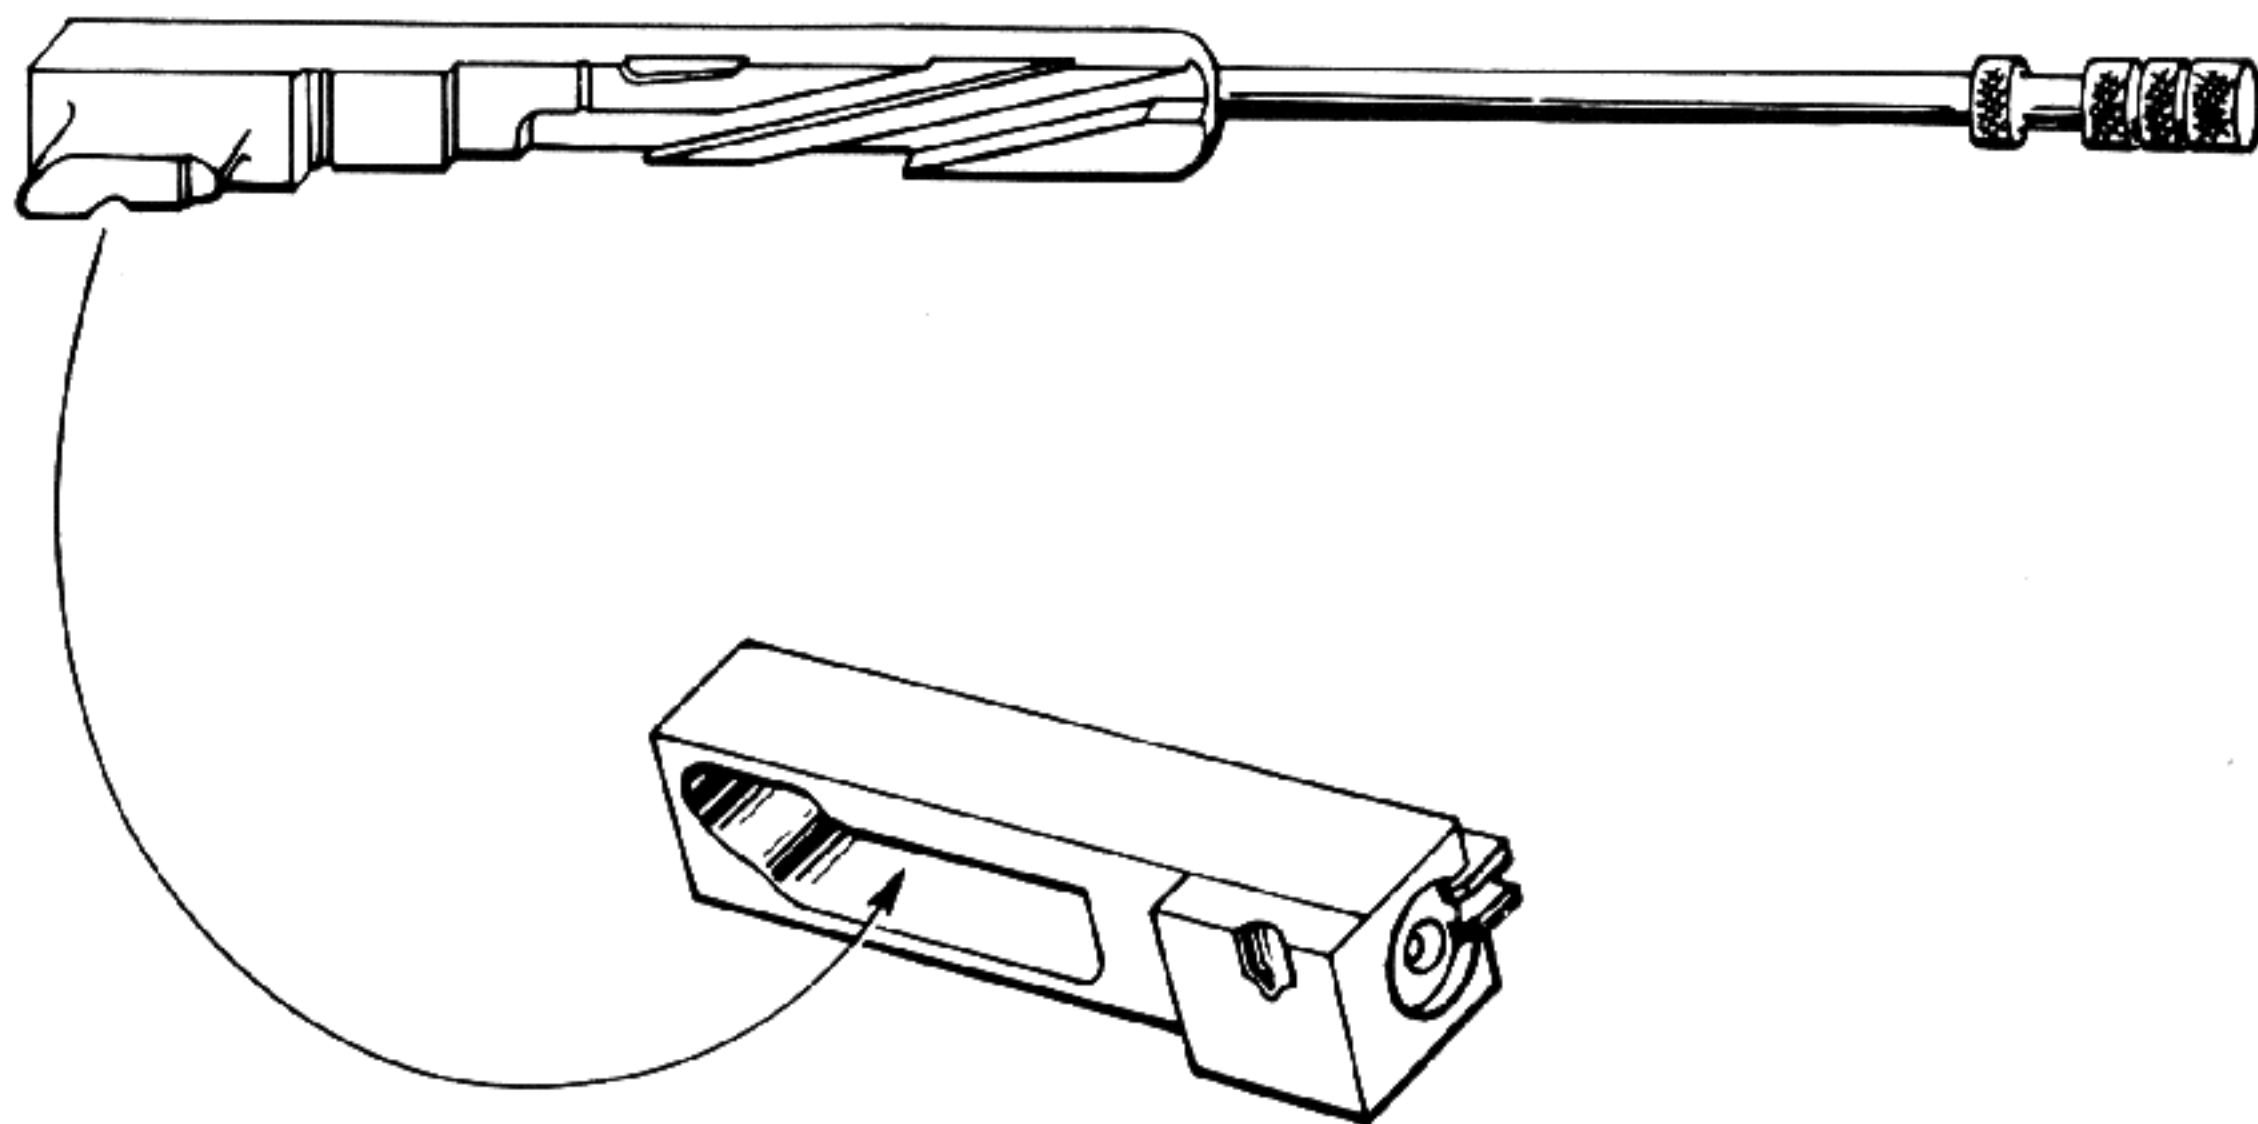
The Goryunov Machine Gun, showing operating slide (top) and bolt (bottom). The stud on the slide operates in the bolt slot to cam the bolt behind the locking shoulder.
